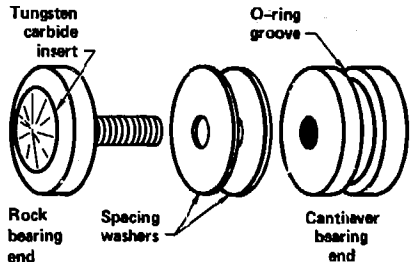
C. Exploded view of the standard compound cantilever button for the U. S. B. M. borehole deformation gauge.
